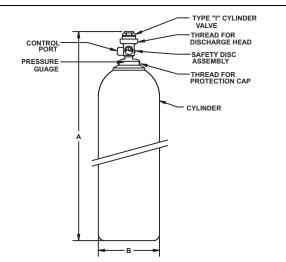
1400 and 2300 cu. in. Nitrogen Siren Driver Cylinder and Valve Assemblies, Vertical Mount Only
